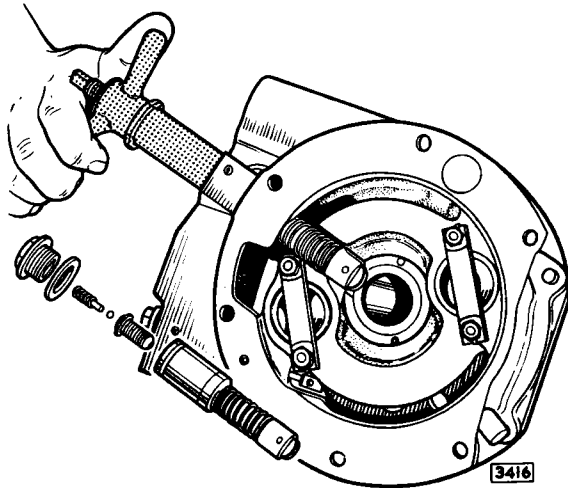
Removing the pump non-return valve. The valve components are shown exploded
